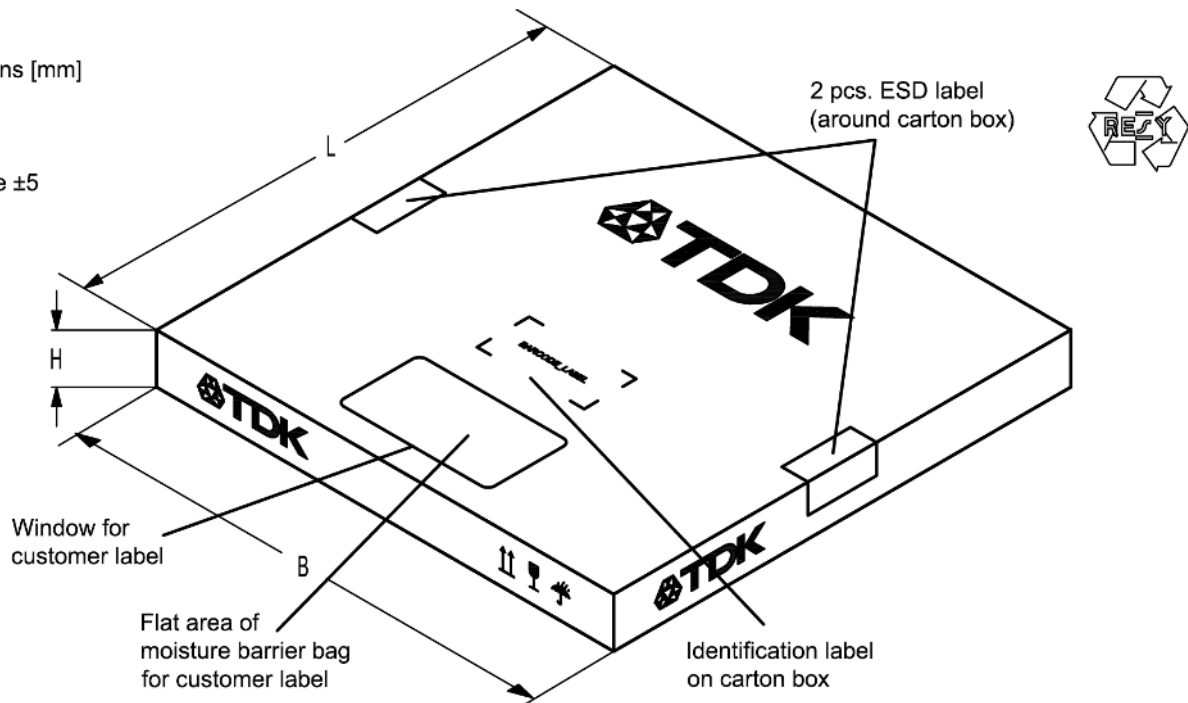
Drawing of folding box for reel with diameter of 180 mm.
